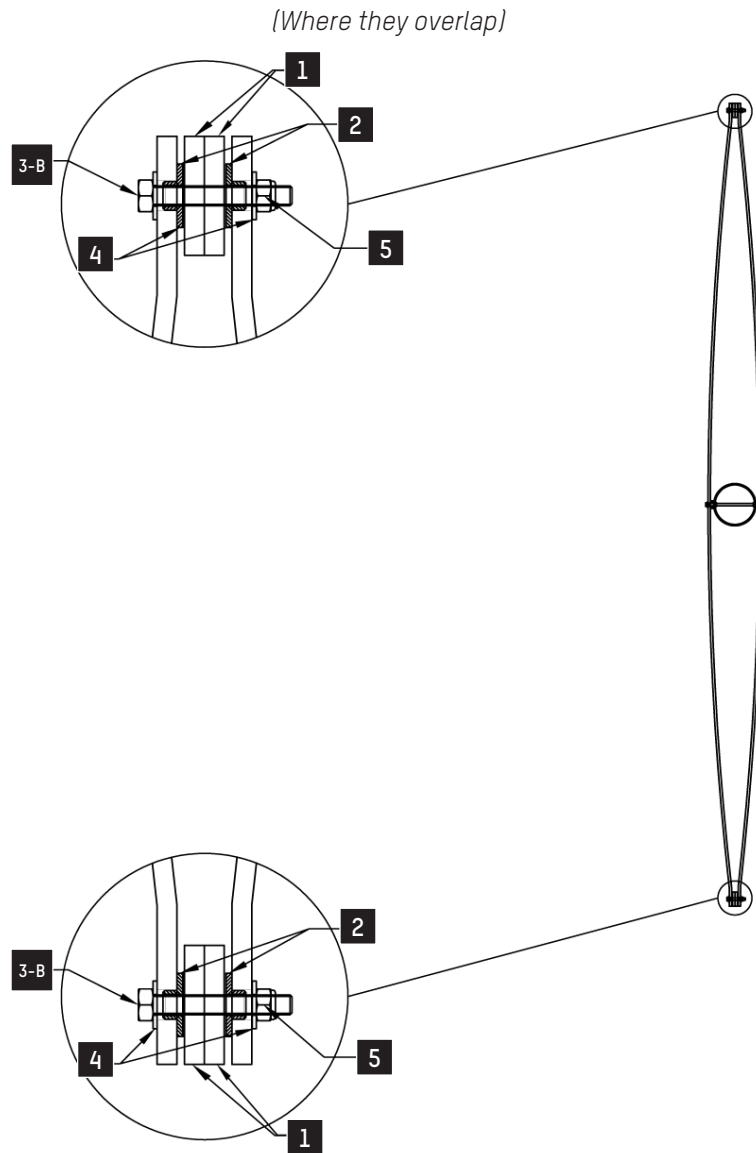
Assembly of the folding fence - Assembly of the upper and lower connection bars
